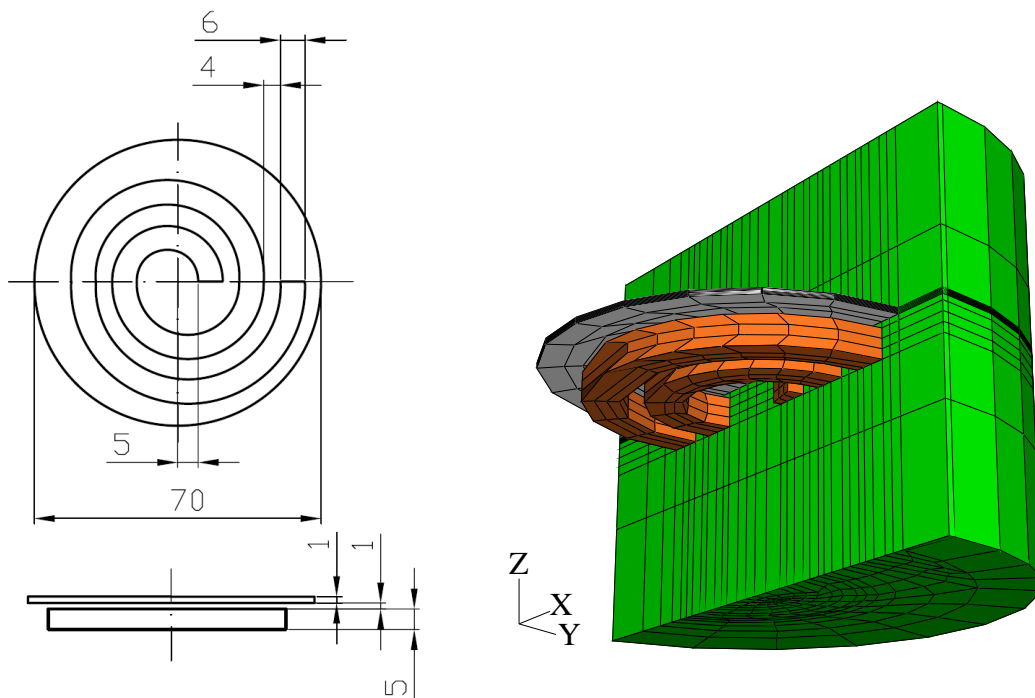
Left: Engineering drawing of the spiral tool coil and sheet metal. Right: Discretized forming model with illustration of tool coil, sheet metal and surrounding air (only right half of air is displayed).
